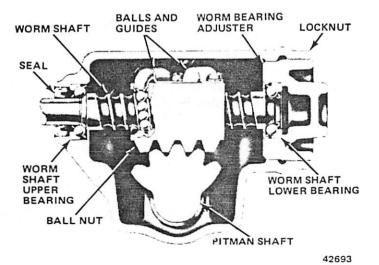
K-1 Recirculating Ball Manual Steering Gear
